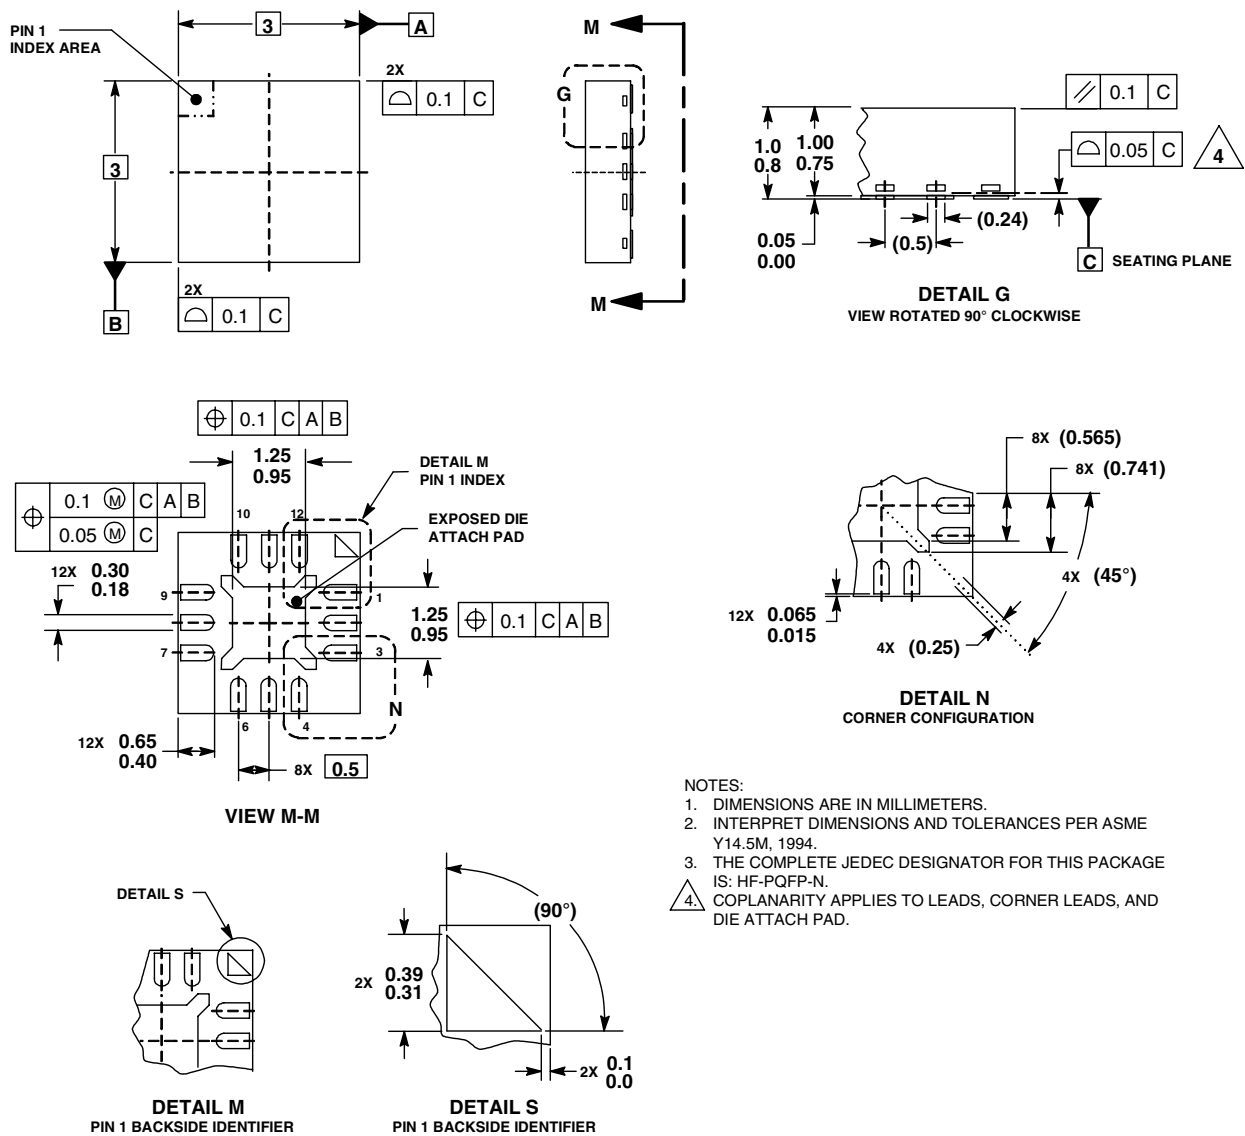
Outline Dimensions for QFN-12, 3x3 mm
